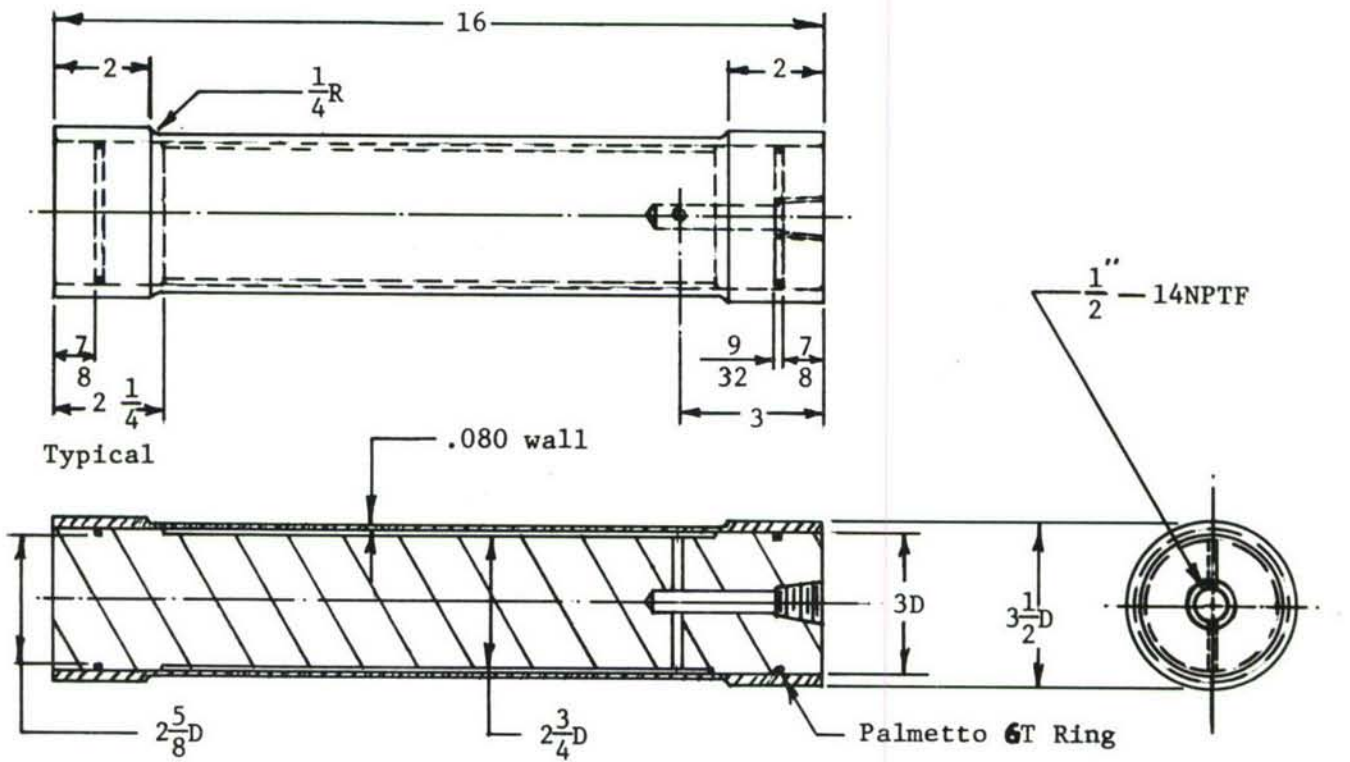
O-Ring Type Steel Pressure Vessel Geometry
